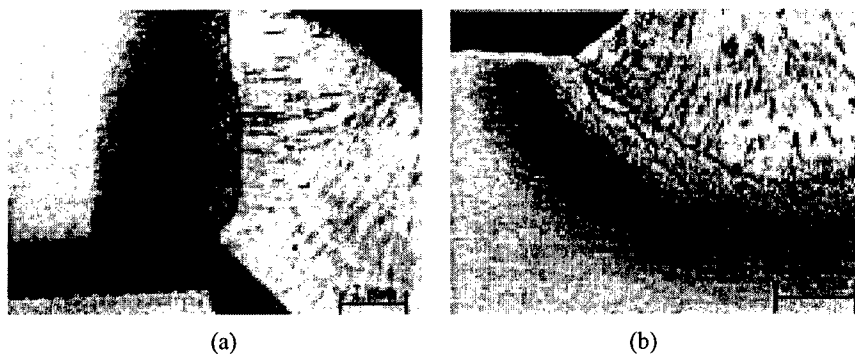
HAZ in C-Mn steel (a) HAC at root of single-pass fillet weld, and (b) HAC at toe of multiple-pass fillet weld [126].
